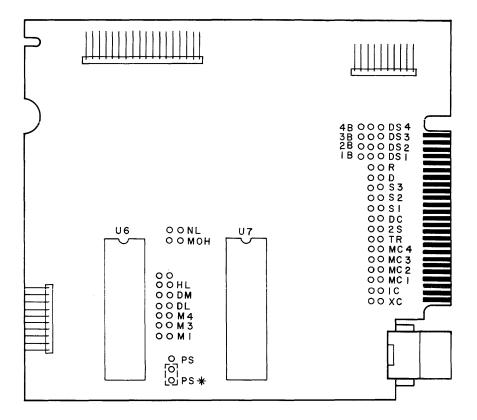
LSI CIRCUIT BOARD ASSEMBLY
